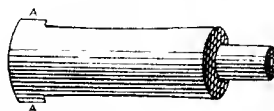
Ring A A on Die smaller than Body Fig. 127 —Ring A A on Die larger than Body.
